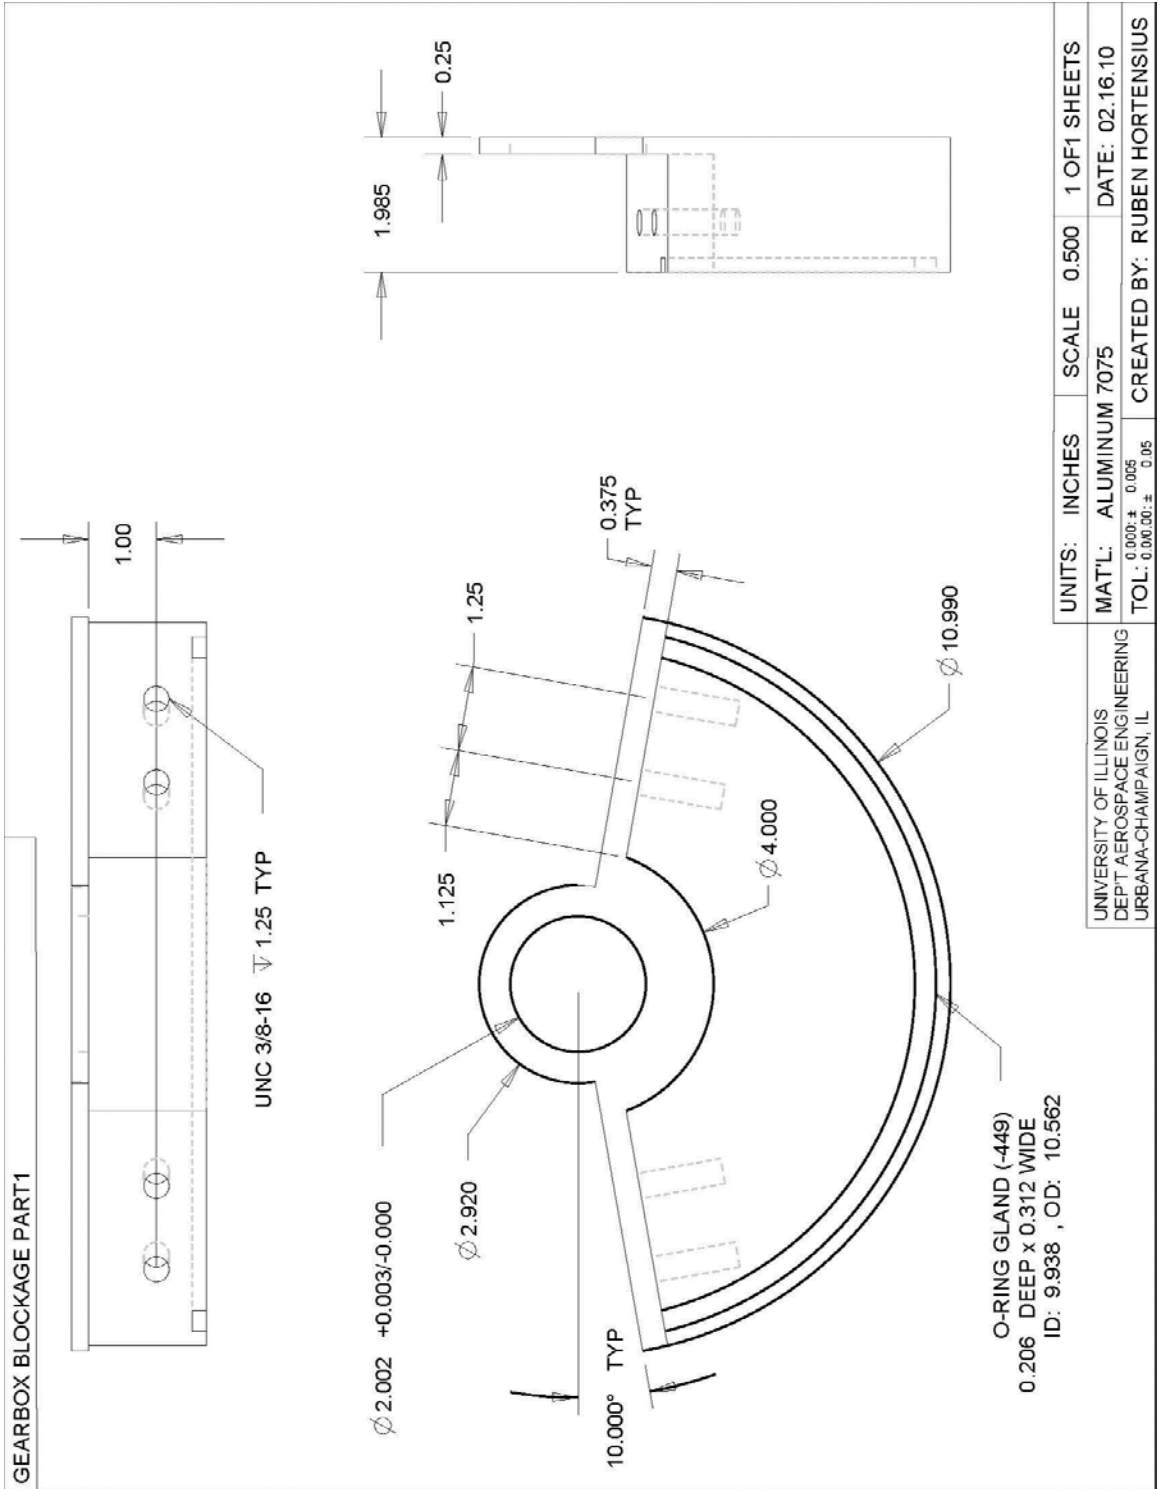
Gearbox Blockage Partial Flange Engineering Drawing.
